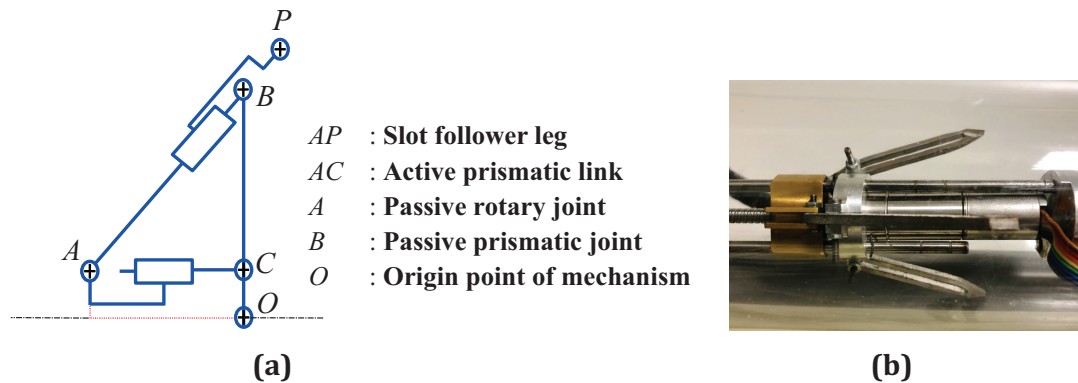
Representation of the (a) geometry of slot-follower leg mechanism and (b) assembly of the mechanism on the existing prototype [VC19b, HCP⁺14]
